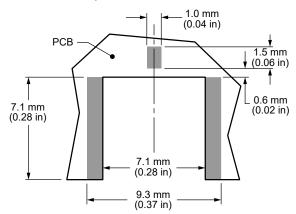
Recommended PCB Footprint for the CONSMA024-G Connector
